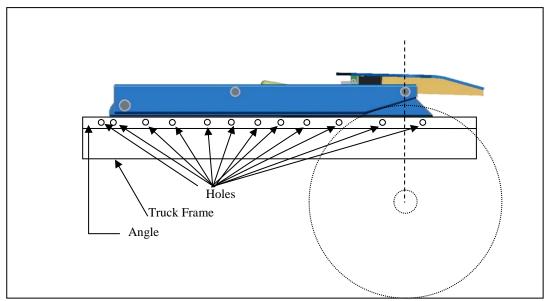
Fitting steel angle to tractor frame and hole locations for FW25-HL6.
